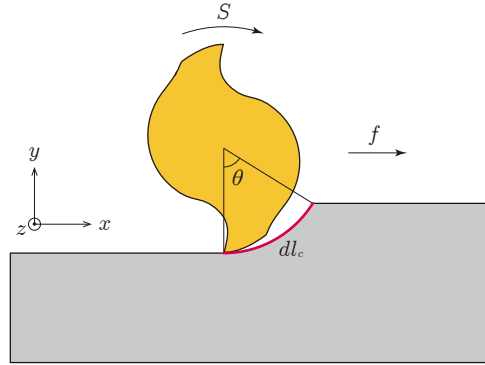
Contact length is the contact distance between the tool cutting edge and the workpiece. (This represents a down-cut case.)
